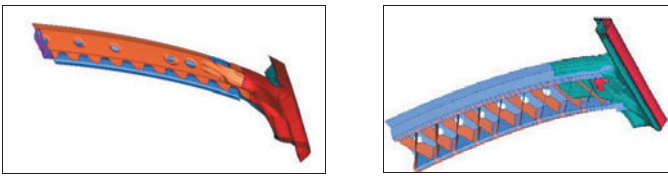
Roof frame with double-shell sheet metal structure (left) and in hybrid design (right) [1]
